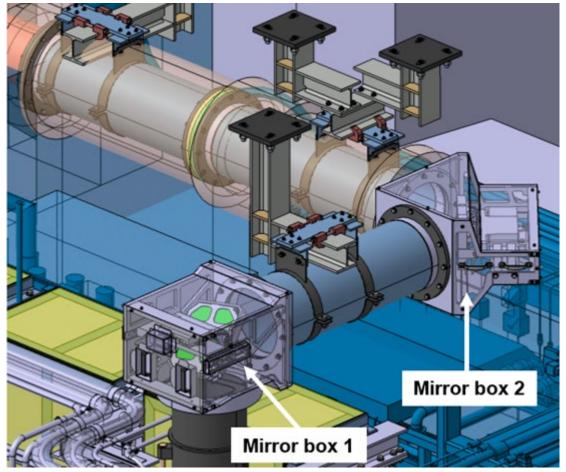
Example of Ex Vessel Optical relay unit (Rough Dimensions Mirror box 1 457 by 457 by 557 mm and Mirror box 2 449 by 698 by 688 mm)
